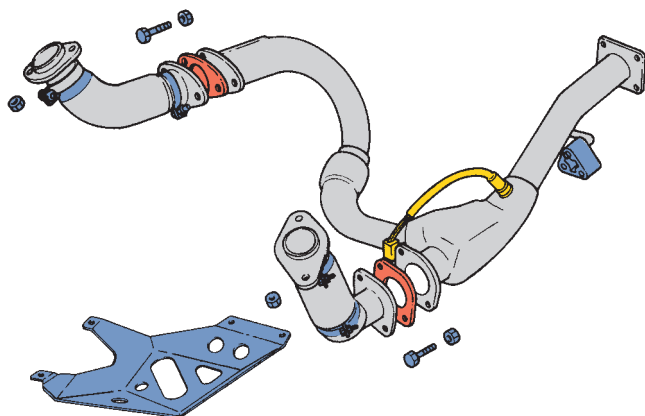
The front exhaust pipe assembly for a V6 engine.
